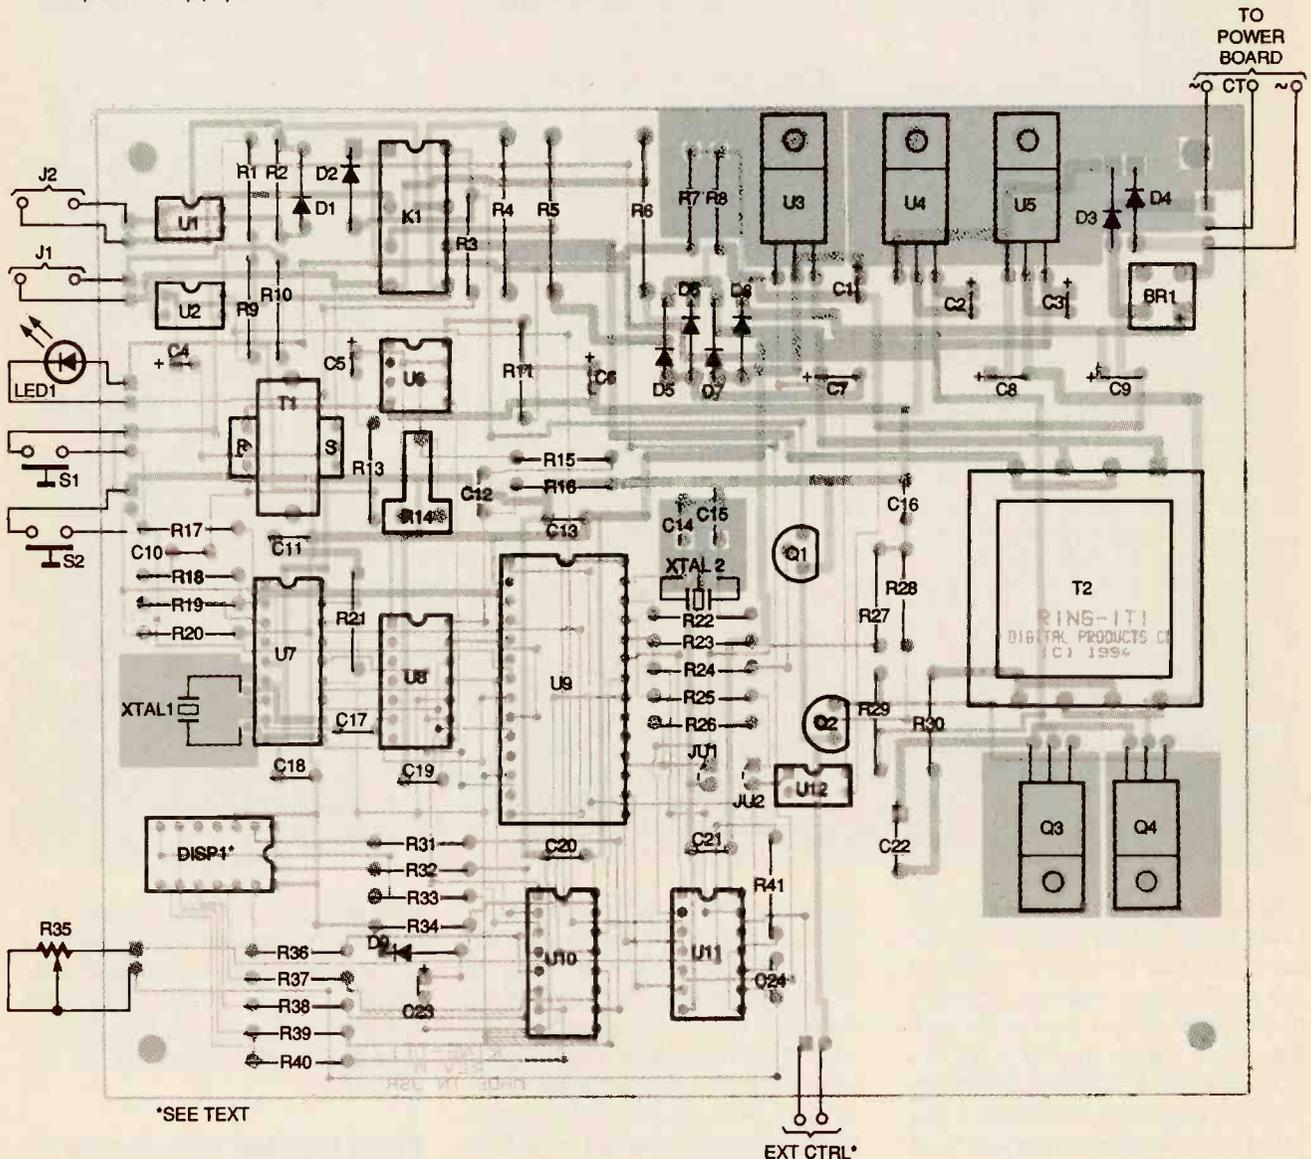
Use this parts-placement diagram when mounting components on the unit's main board.
